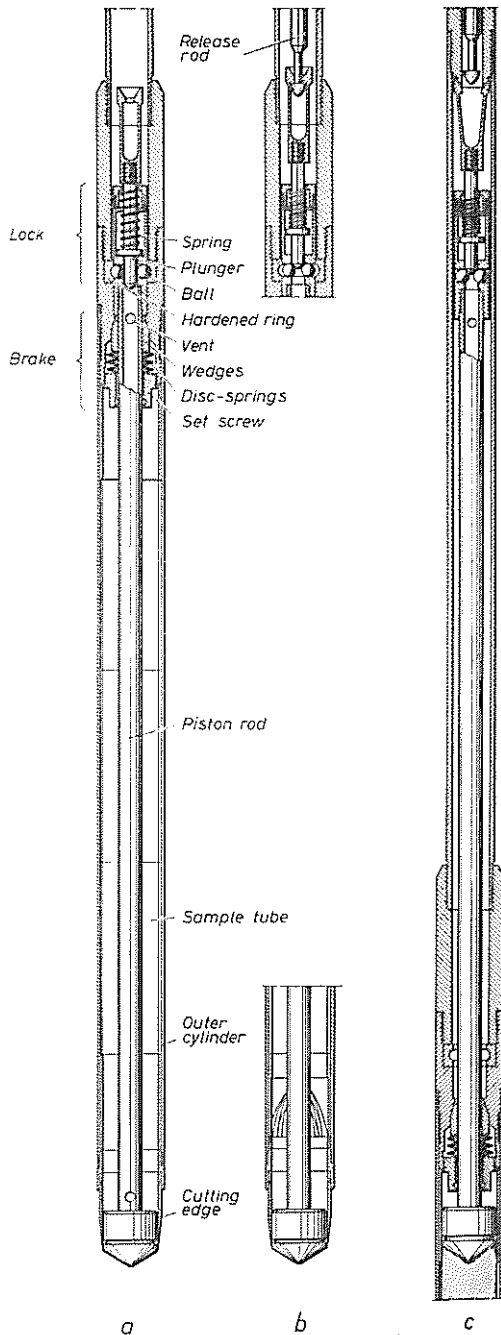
Standard sampler prototype, St I (for dimensions, cf. Figs. 5—7)
